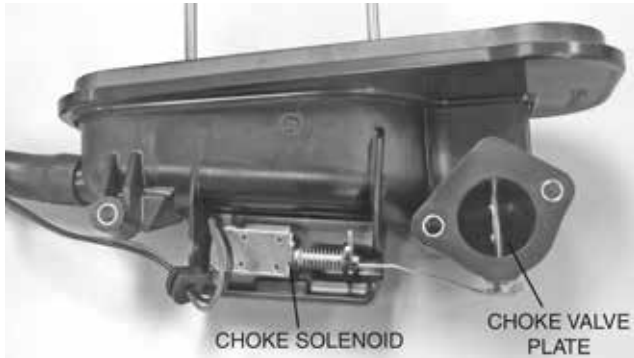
Choke Solenoid and Choke Valve Plate - CorePower
